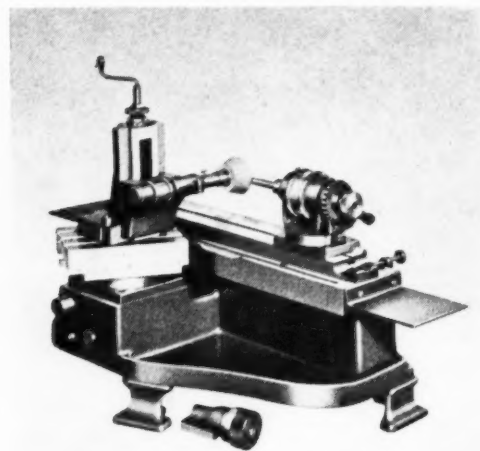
Rear View of Grinder with Spline Grinding Attachment
